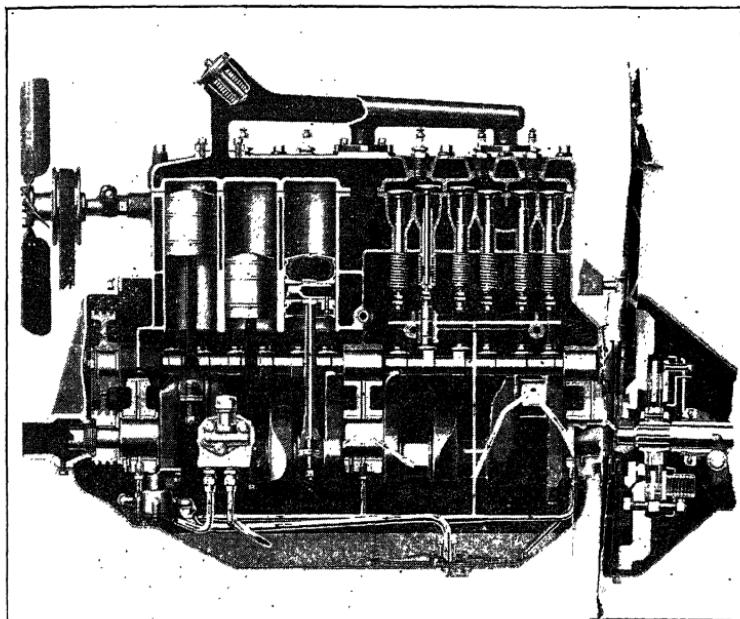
Cutaway View of Engine in Which Full-Force-Feed System Is Employed
